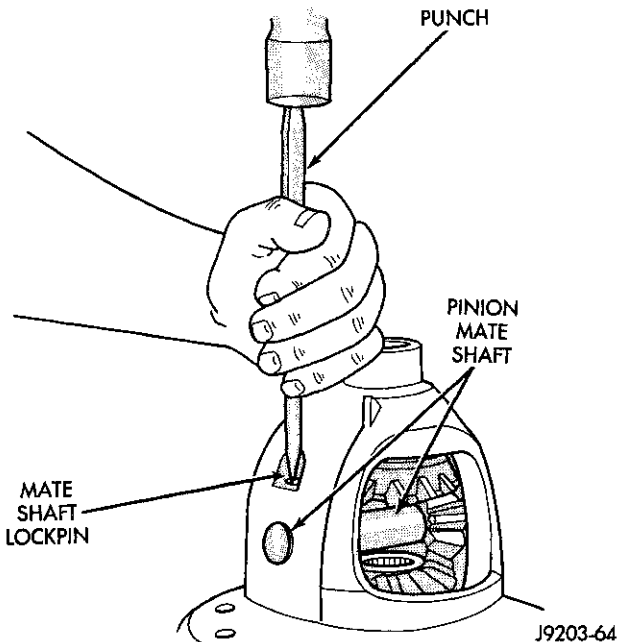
Pinion Mate Shaft Roll-Pin Installation
